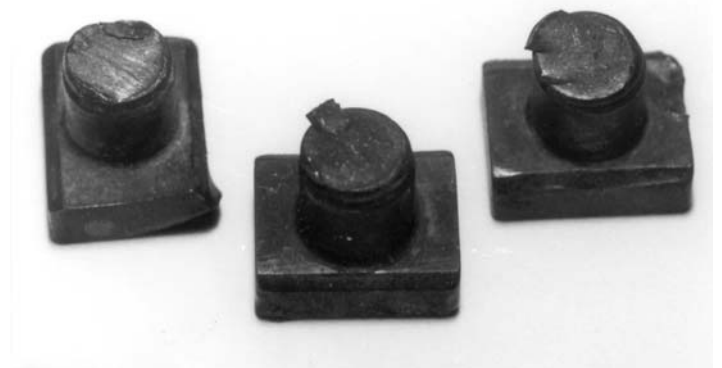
Fracture surfaces of some of the T-headed bolts. Gross features of fracture indicate shear loads.
